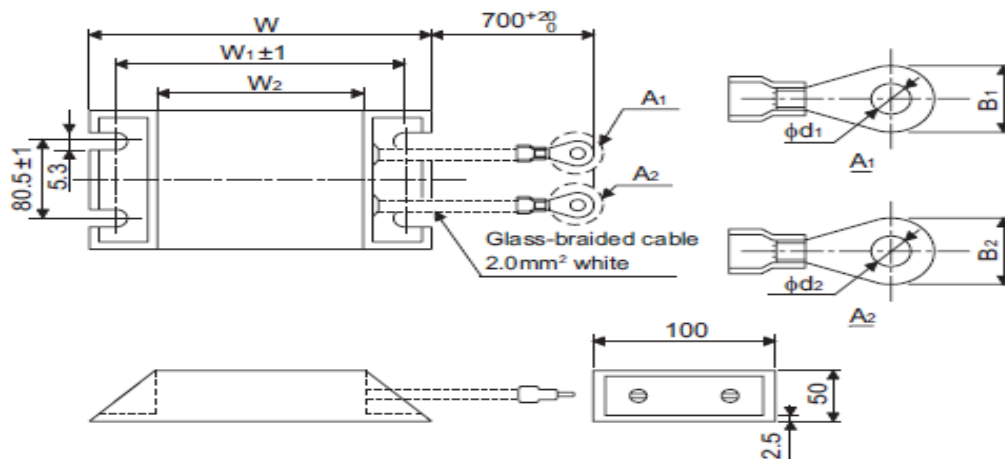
Overall and mounting dimensions of brake resistor from Table 5.8
